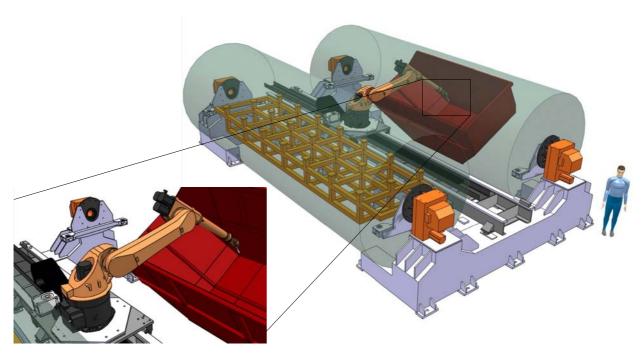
Layout of robotized manufacturing cell for final assembly of family of containers. The cell is based on robot KR 30 L16, mfd. by KUKA which besides welding carries out identification of geometry and assembly location
